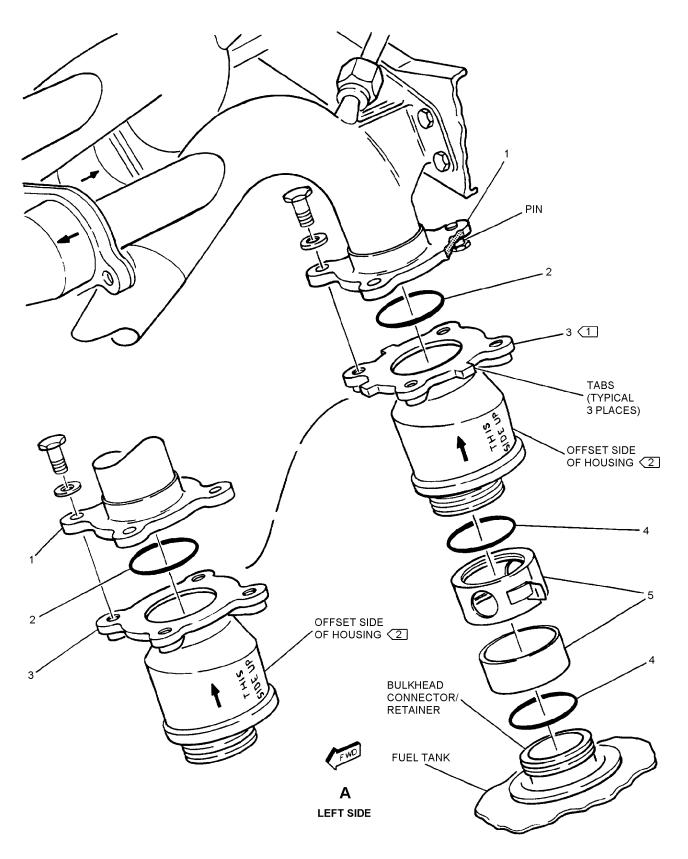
Engine Motive Flow Check Valve (5VAP561 or 5VAR562) (Sheet 2)
